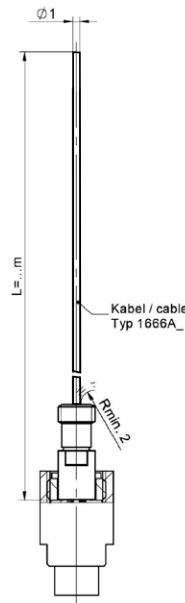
Pressure sensor Type 6172B with single-wire cable
